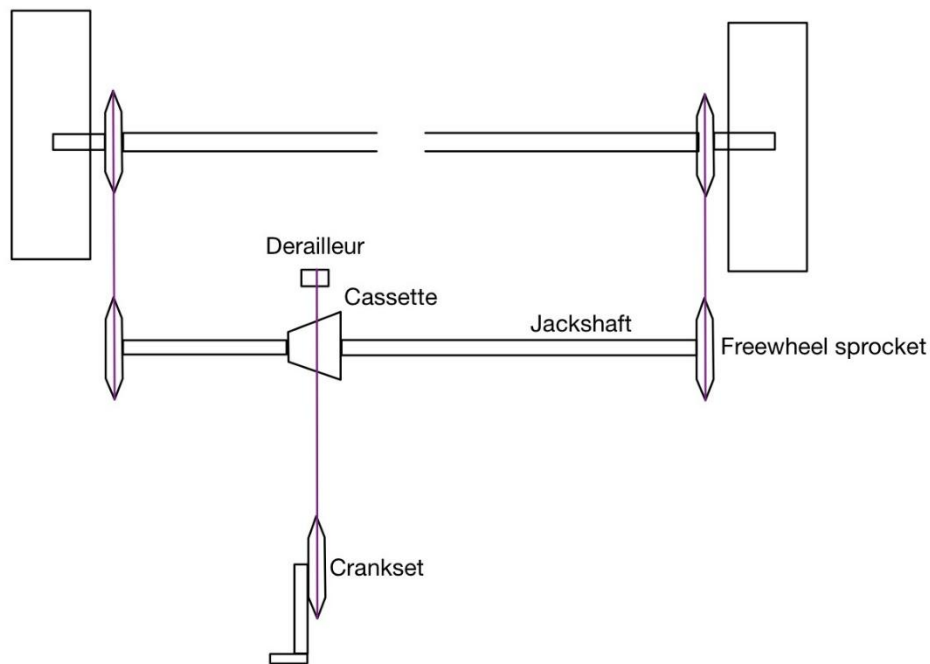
Sketch of the drivetrain layout for Concept 1: Jackshaft Dual Freewheel Drive (Source: Author).
